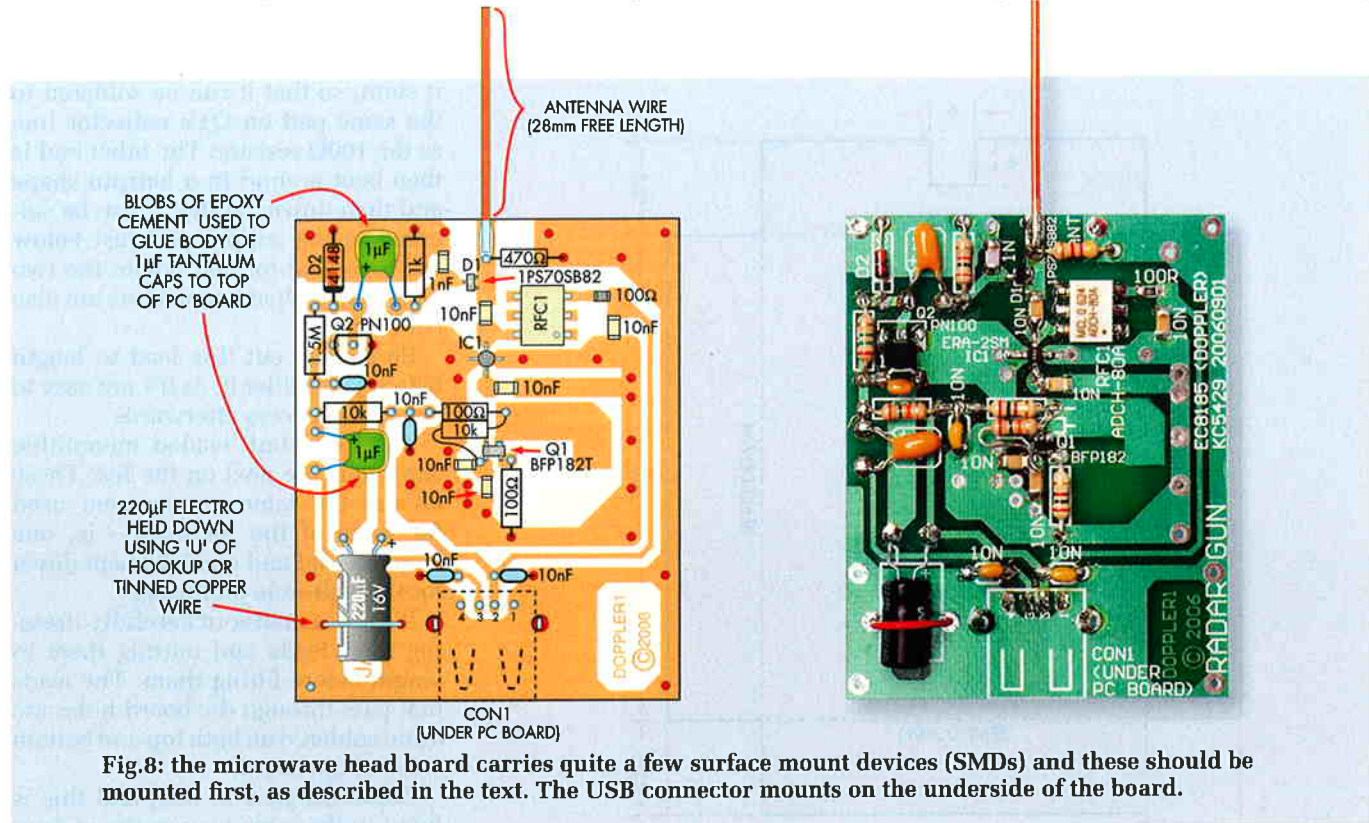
the microwave head board carries quite a few surface mount devices (SMDs) and these should be mounted first, as described in the text. The USB connector mounts on the underside of the board.
